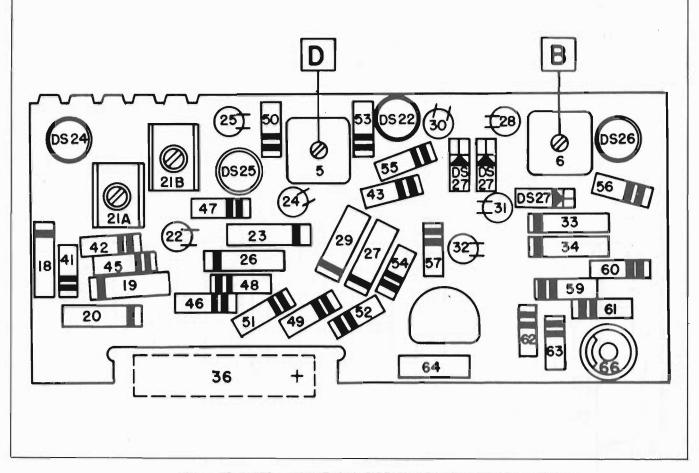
PARTS LAYOUT ON CIRCUIT BOARD - 985443 - RADIO
